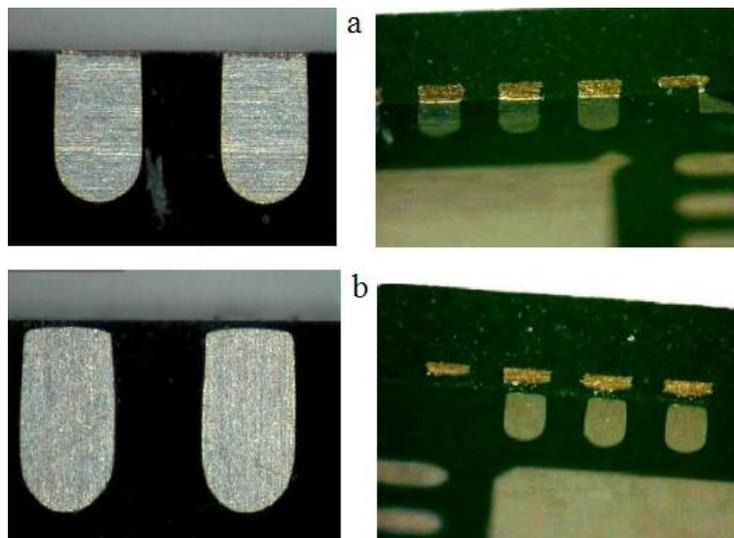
MAP uDFN/QFN: Left-Bottom View, Right-Tilted to Show Side and Bottom Views: a) "E" Version, b) "S" Version
